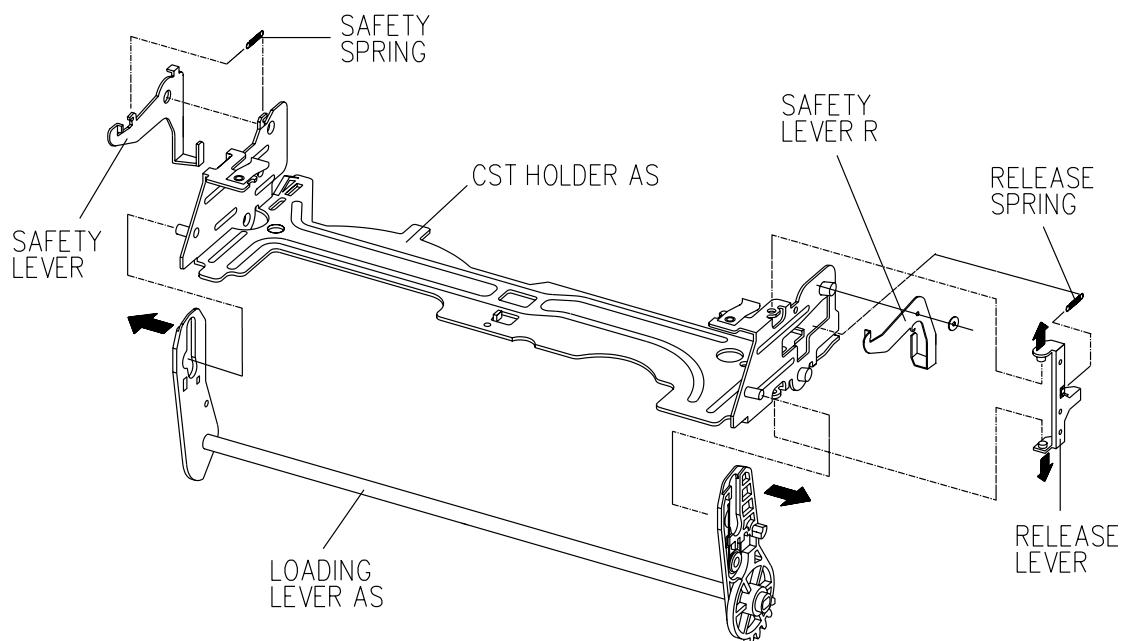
DISASSEMBLY OF THE CASSETTE HOLDER ASS'Y
